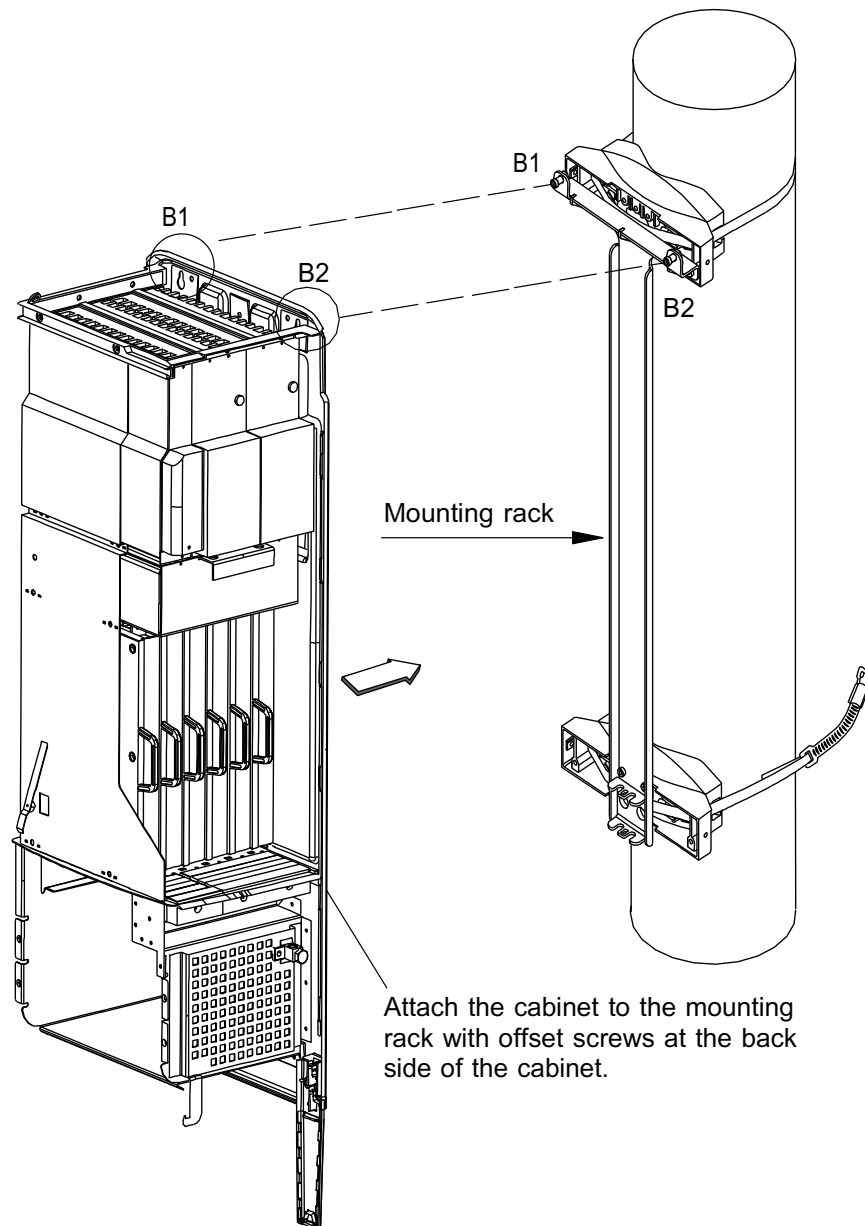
Pole mounting the cabinet (pole mounting kit version 2)
